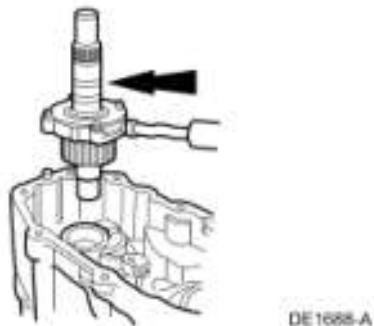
Locating Rear Output Shaft And Pump Assembly
